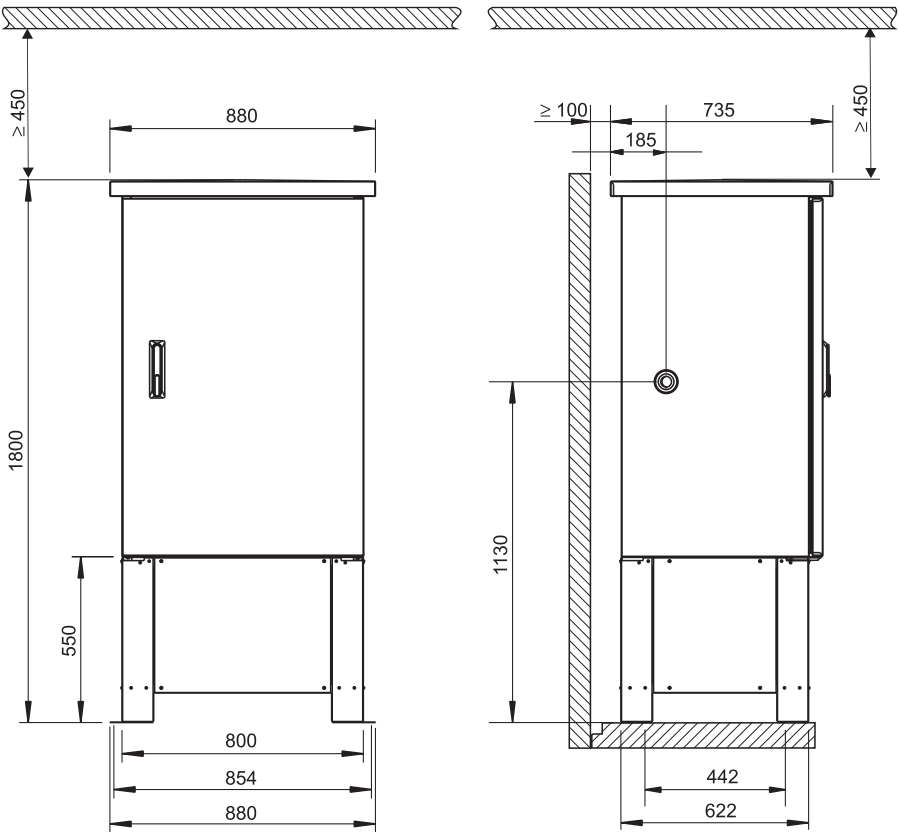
Standard cabinet with cabinet base (dimensions in mm)
